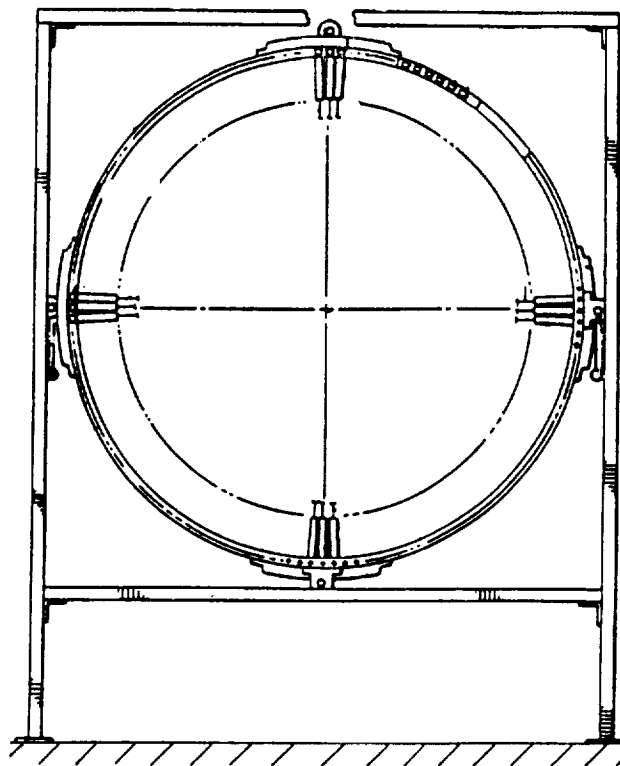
ARC CIRCULAR BRAIDING MACHINE
